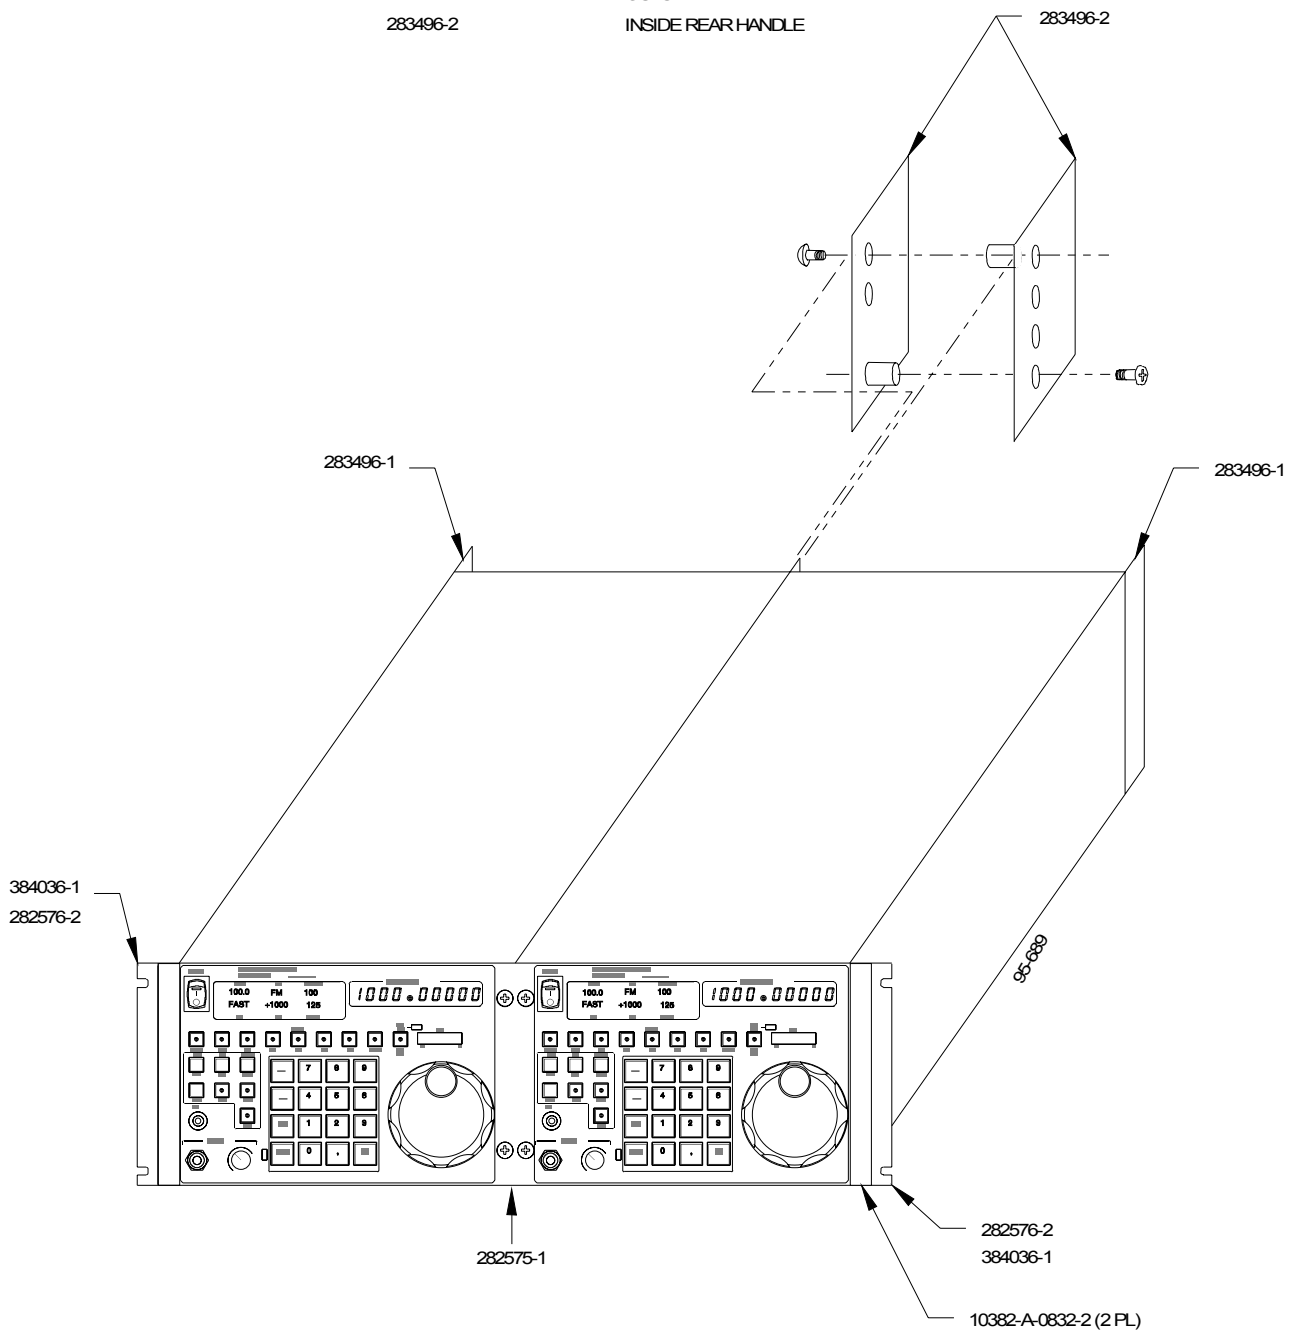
WJ-8611, Configuration of Rack Mounting Accessories
